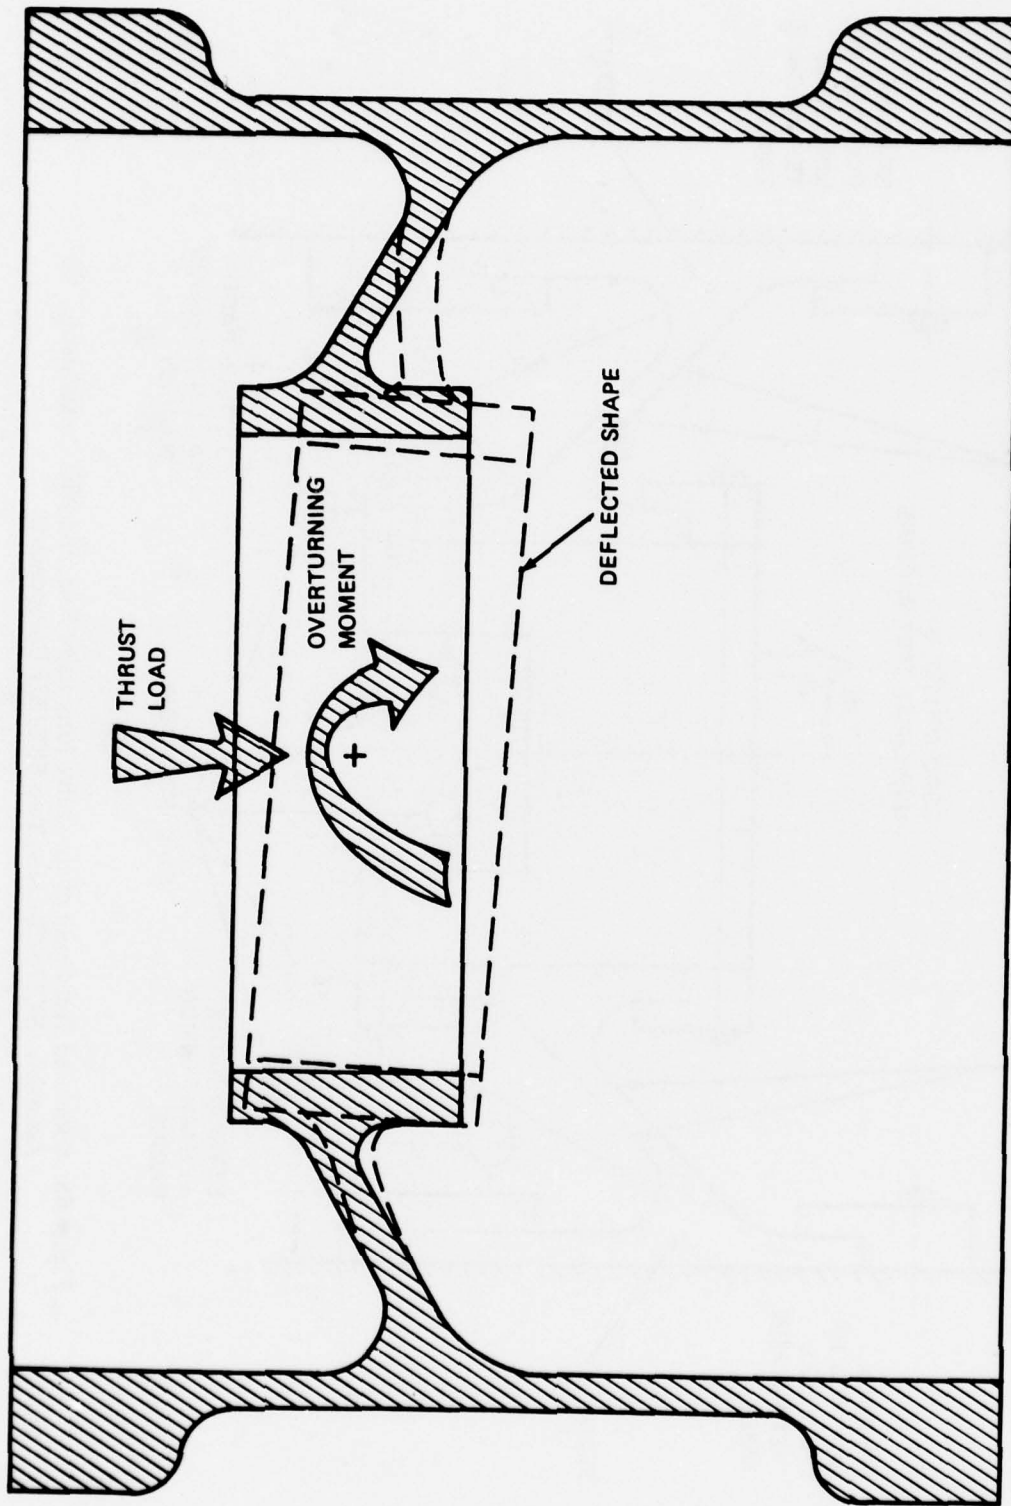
Sketch of Thrust Bearing Housing Showing Applied Bearing Reactions and Deflected Shape.
